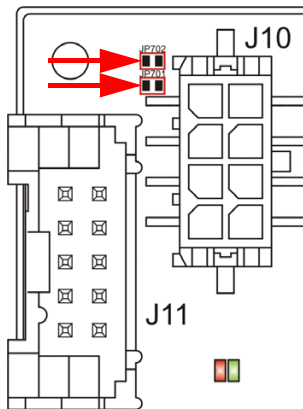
Controller PCB – Solder Pads (JP701 & JP702)
